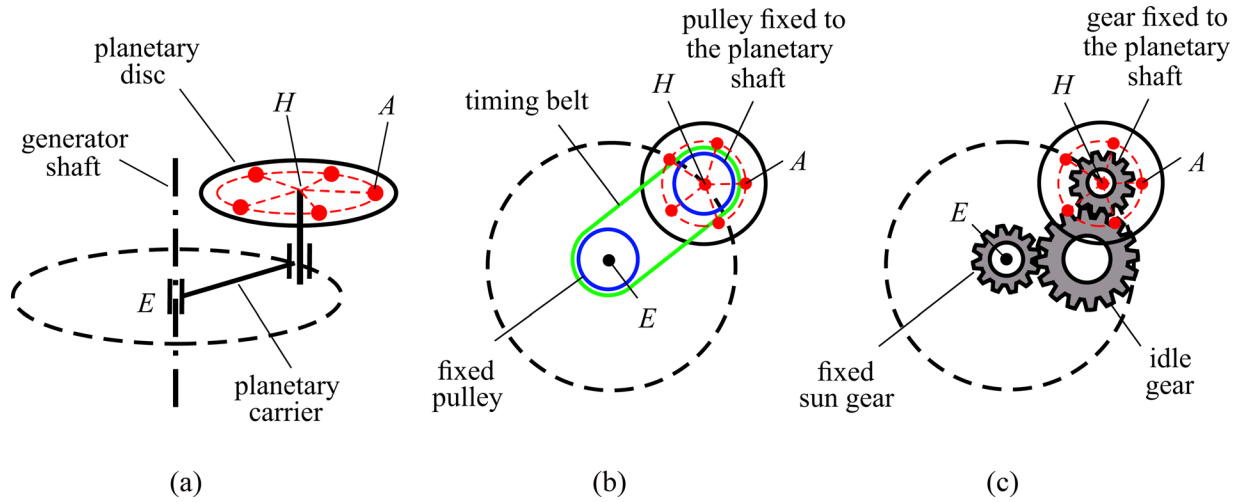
Planetary mechanism and design solutions: (b) timing belt and pulleys or (c) gears
